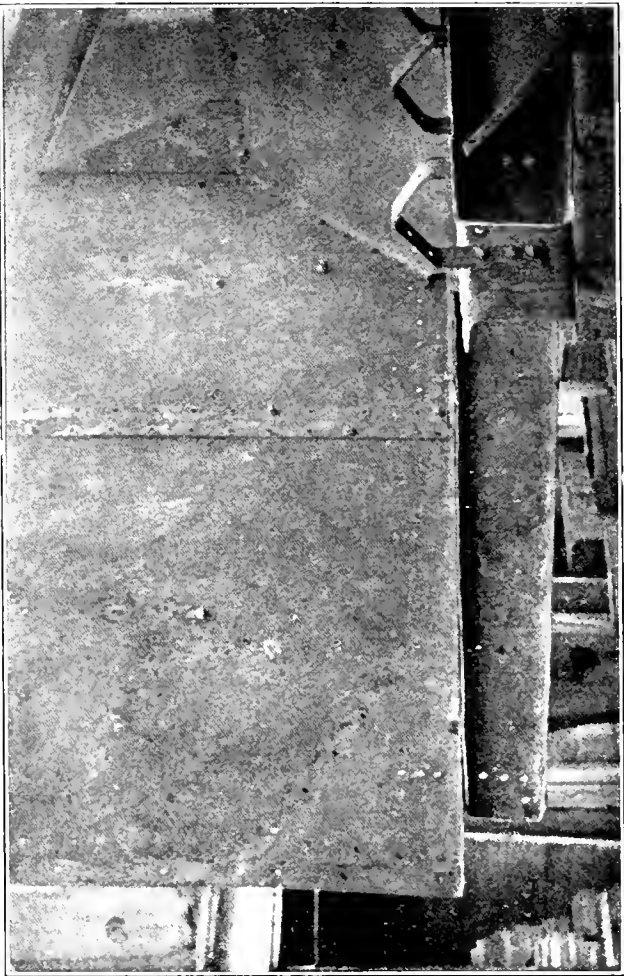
CENTER SILLS ON A HOPPER CAR BROKEN BACK OF THE BODY BOLSTER AND A SIDE SILL BROKEN AT THE BOLSTER.
